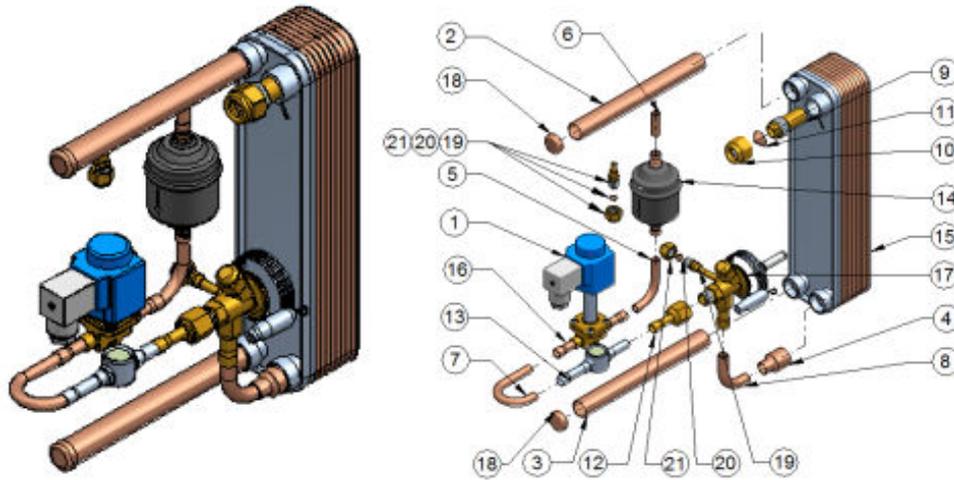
Explosion diagram of expansion valve kit with liquid subcooler
